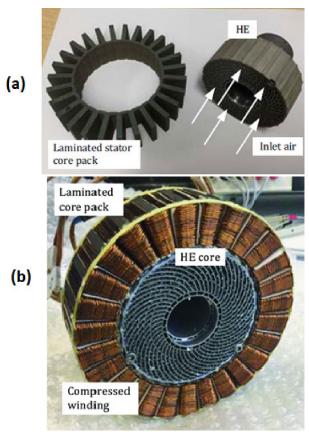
(a) prototype laminated stator core pack and HE-Newcastle University, (b) stator-winding assembly with integrated HE [38].
